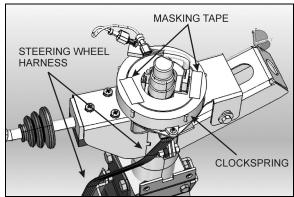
LOCKING THE CLOCKSPRING IN PLACE
